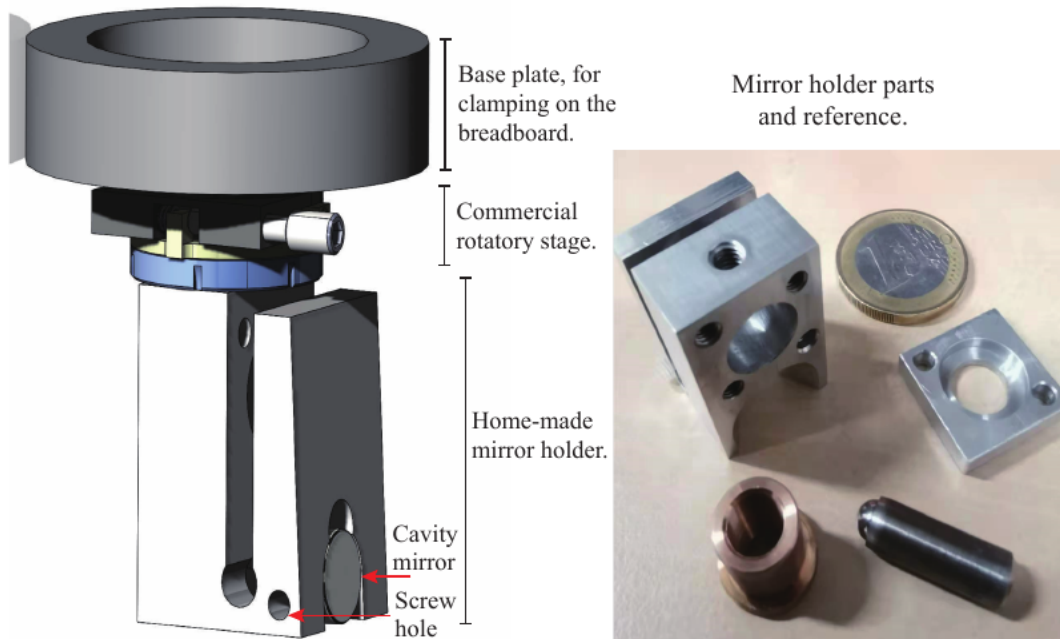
Cavity mirror holder design. The mirror holder is composed of three parts. From top to bottom: Base plate, which is used for clamping on the breadboard and connecting the remaining parts with three screws. Commercial rotatory stage, which enables a fine tuning of rotary angle of  $17^\circ$ . Homemade mirror holder, which can grab and release the cavity mirror without changing alignment, the screw barrel on the back enables a fine tuning of the vertical angle of the mirror (see the right pictures for details). The combination of the rotary angle and vertical angle freedom makes the tuning of the cavity mirror possible.
